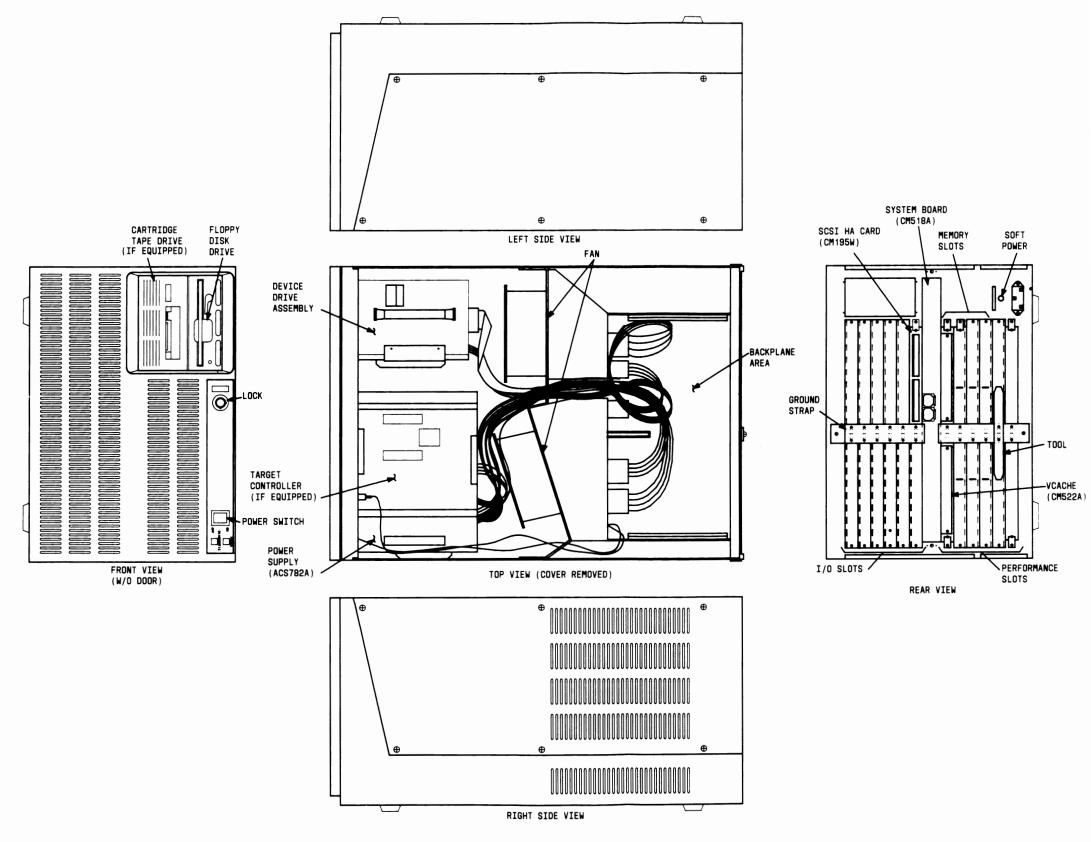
3B2/600 Computer Cabinet Assembly Drawing (ED-3T023-30)
